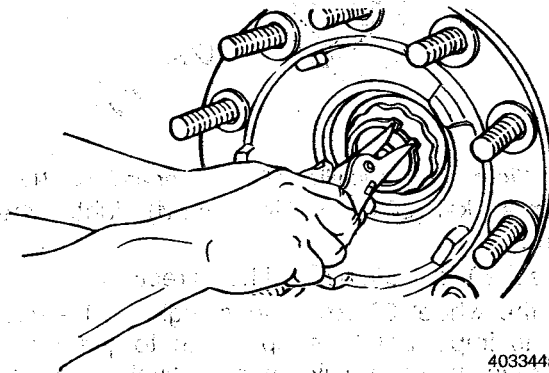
Installing Snap Ring (Shown with Wheel Removed)
